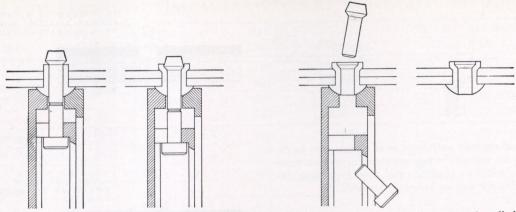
Hollow member and stem of the regular type Cherry Blind Rivet are inserted in hole. Stem is pulled, cylindrical upsetting head expands rivet tail to form tulip head. Continuing pull fractures stem which drops out of the head and the tail of rivet as shown.
